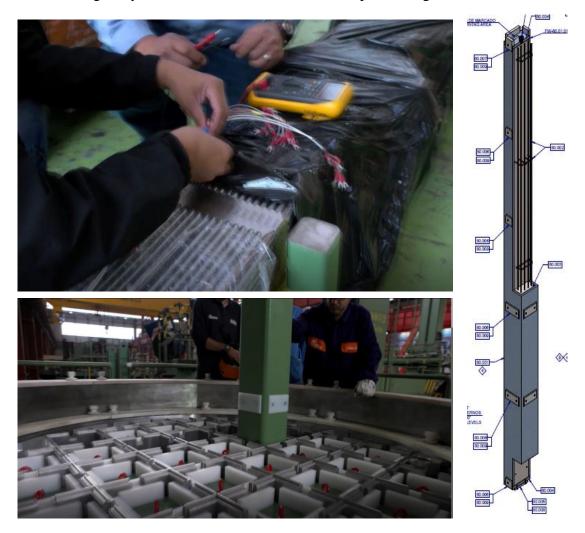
SNL staff instrumenting the rods of the three surrogate fuel assemblies (up), sketch of a simulated fuel assembly (right) and loading process of the simulated fuel assembly in the basket of the cask (bottom)
